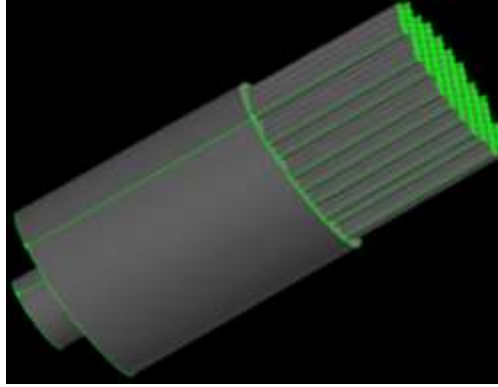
Model of Shell and tube Heat exchanger conical header part.
